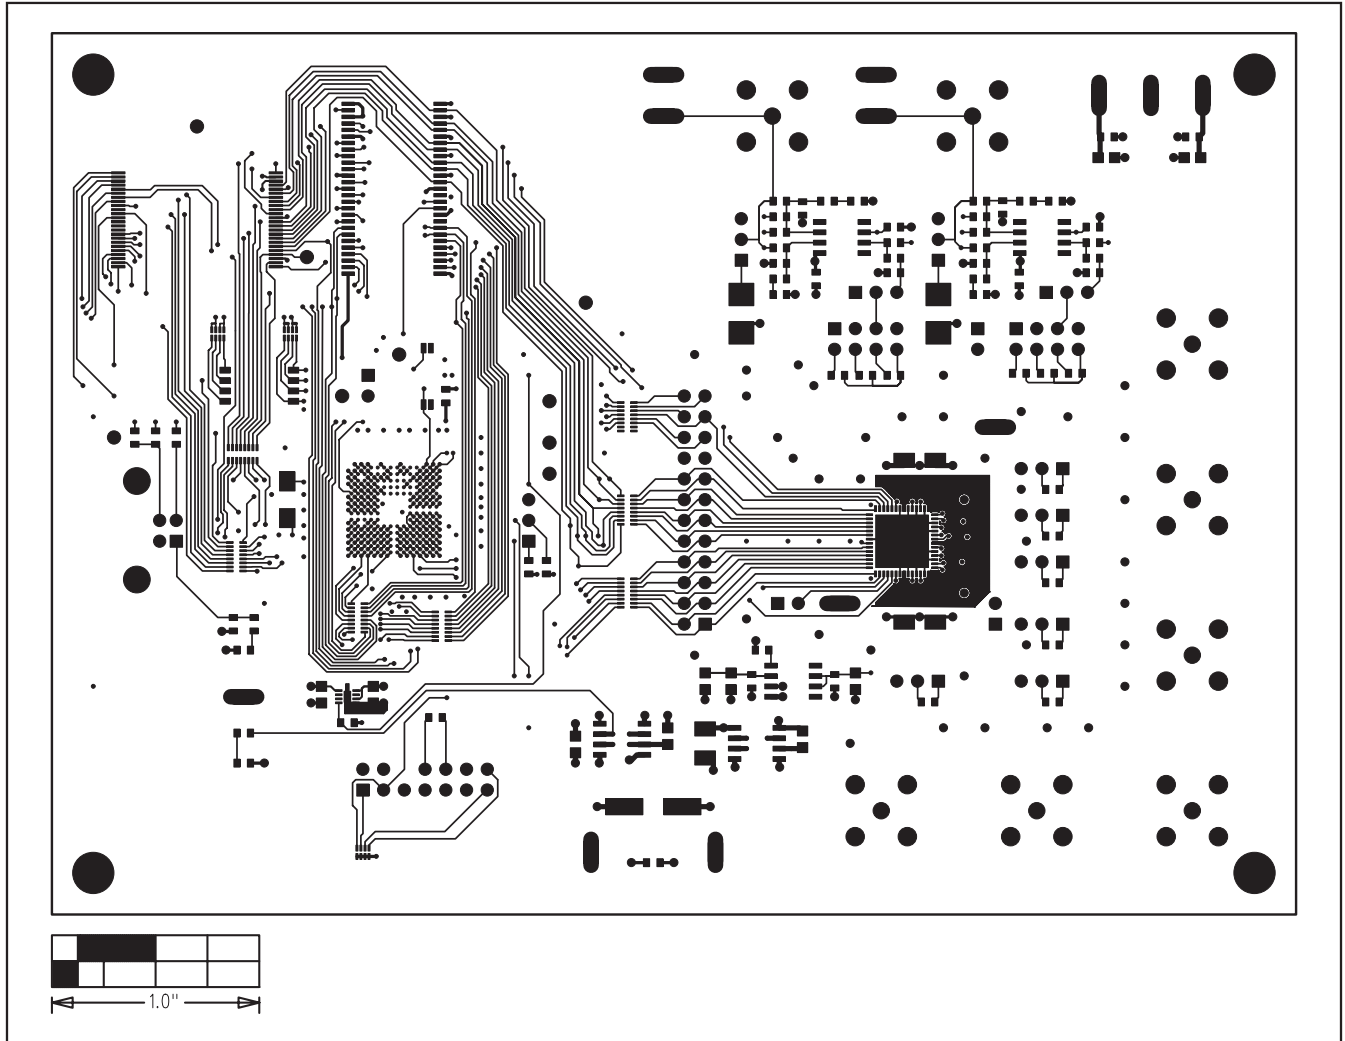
MAX11046 EV Kit PCB Layout—Component Side
